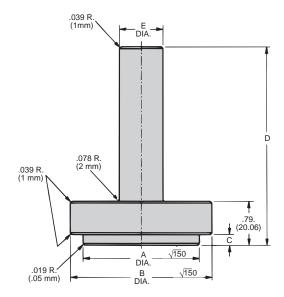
SHAFT SEAL INSTALLATION TOOL
